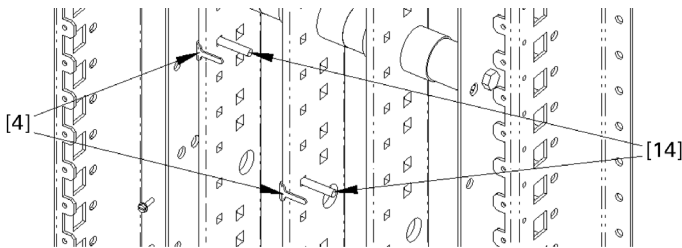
Installing carriage bolt assemblies on phases A and B, isometric view.
